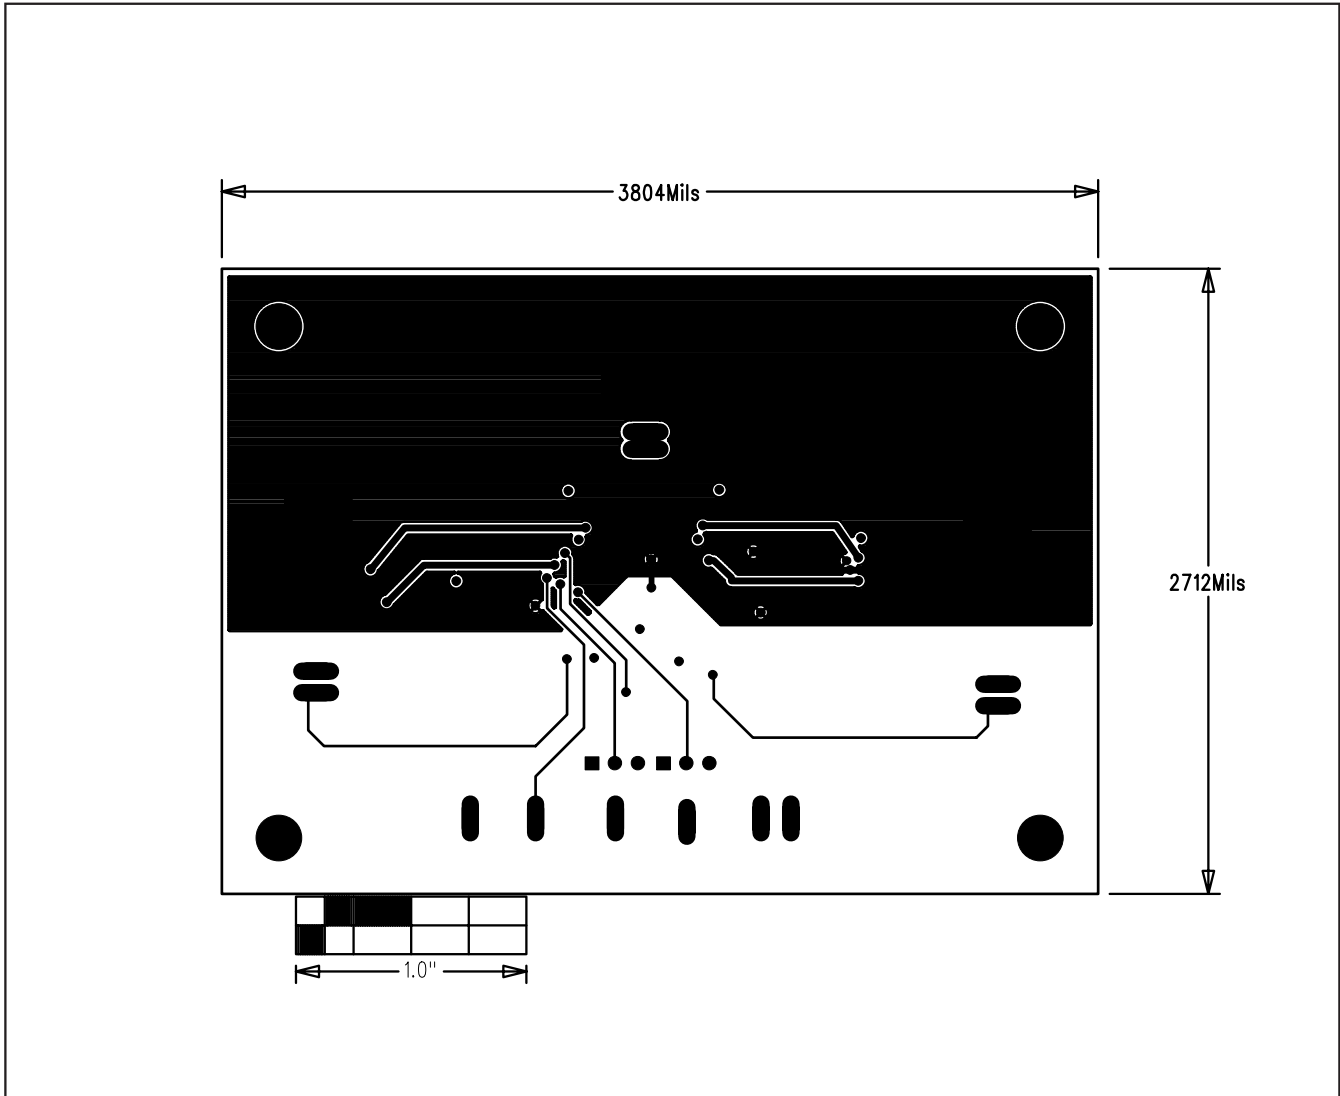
MAX8538 EV Kit PC Board Layout—Solder Side
